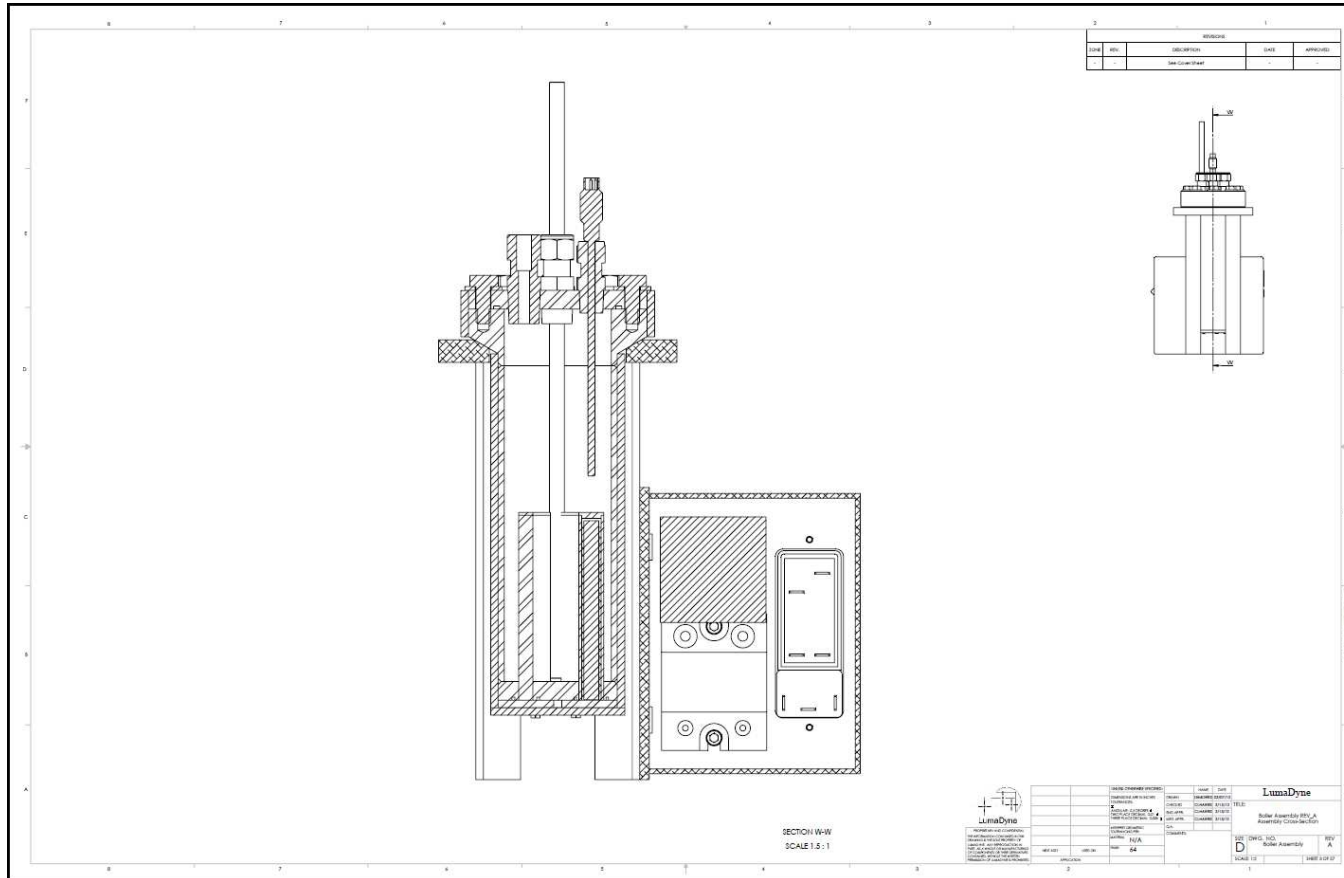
An assembly cross-section view of the miniature steam generator
